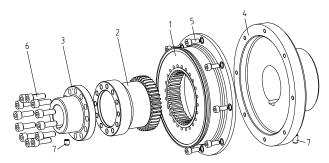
BoWex-ELASTIC® type HEW-ZS (size 48 to G 80)
